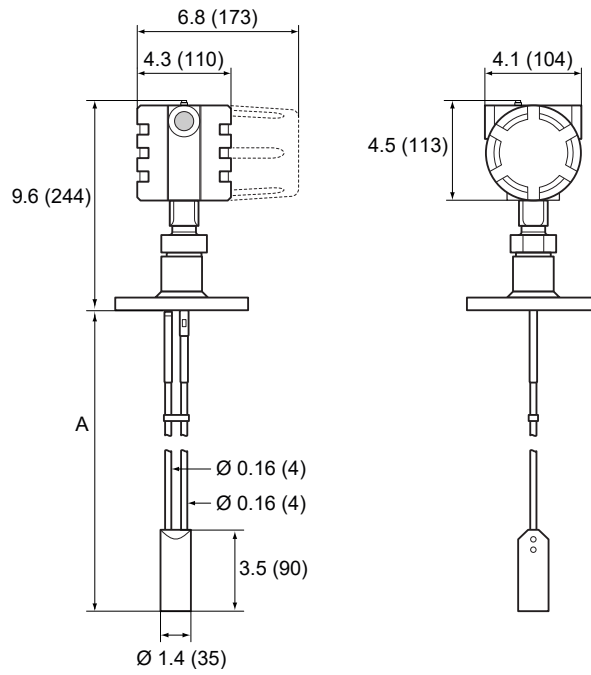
Rigid Twin Lead Probe with Threaded Connection
